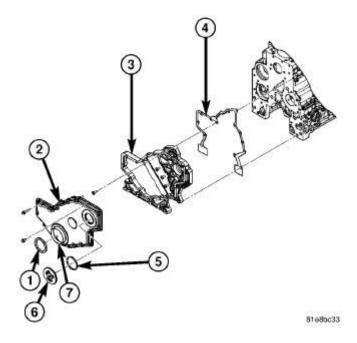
Front Cover Assembly Components Courtesy of CHRYSLER GROUP, LLC
